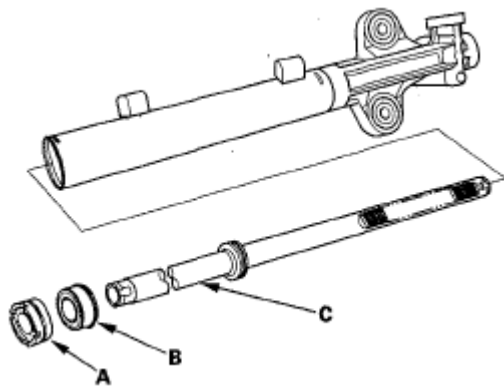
Identifying Rack Stop, Rack Bushing And Steering Rack From Steering Gearbox
